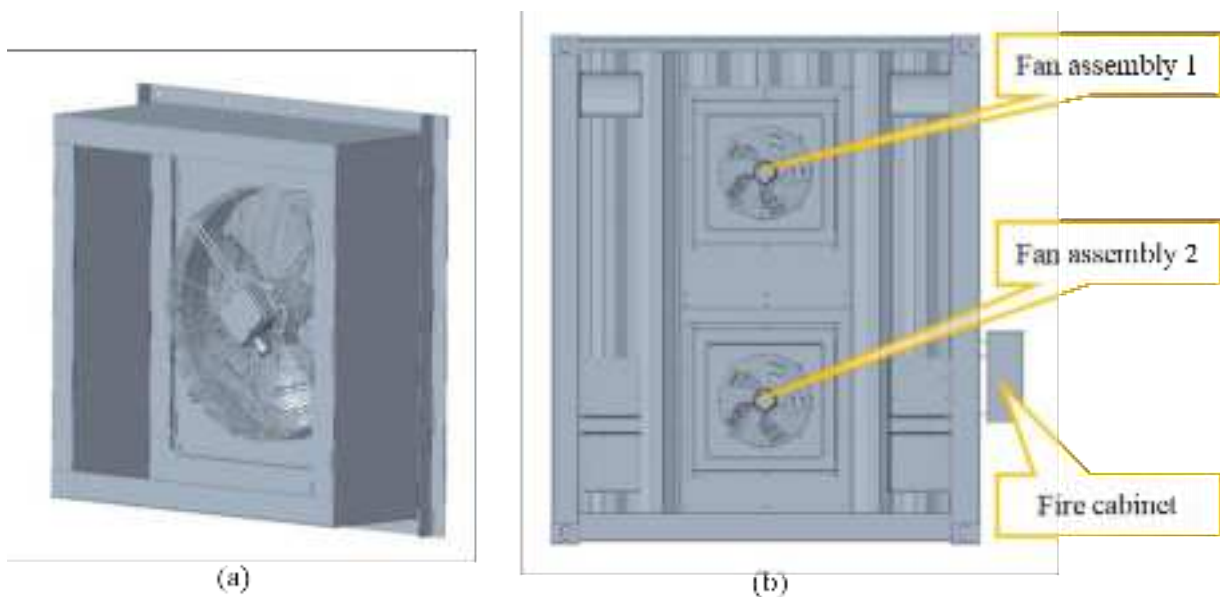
(a) Diagram of fan assembly (b) Installation diagram of container fans.
